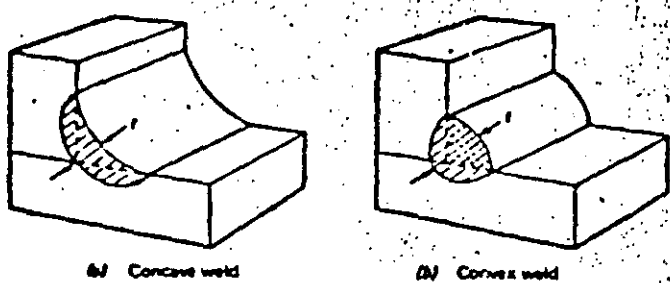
The leg size and the surface of a concave fillet weld (a) may be larger than that of a convex bead (b), but its throat, *t*, may be considerably smaller.
